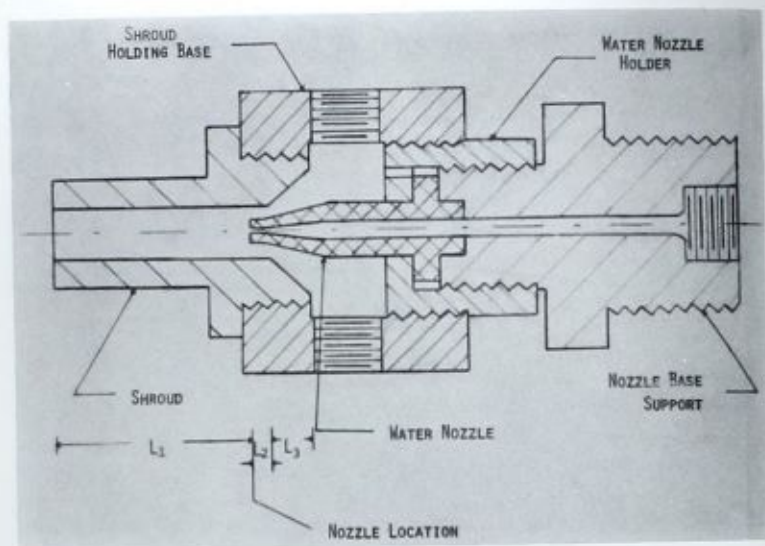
Water jet nozzle, shroud mounting base, and shroud assembly.
